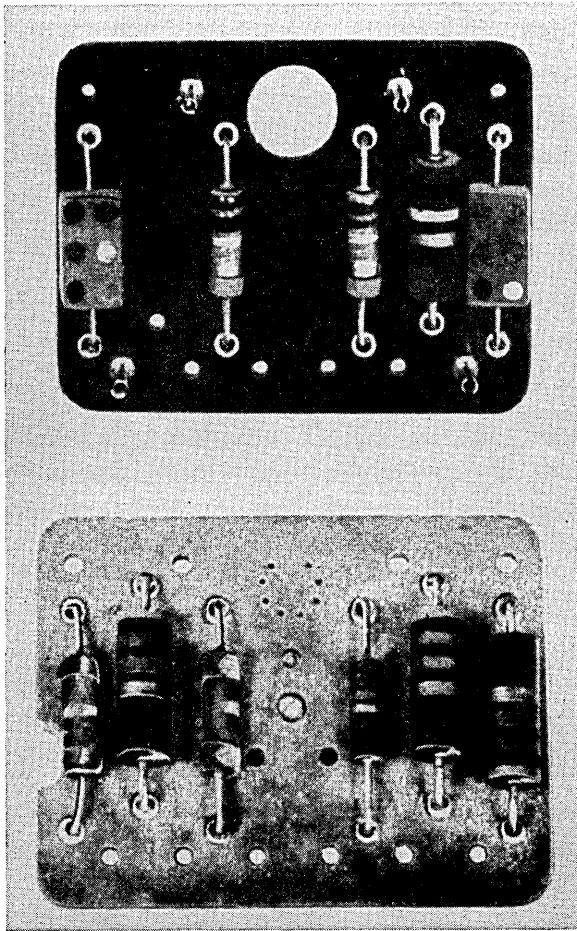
Typical (2 inches by $1\frac{1}{2}$ inches) circuit board handled by the Mini-Mech component assembly unit
